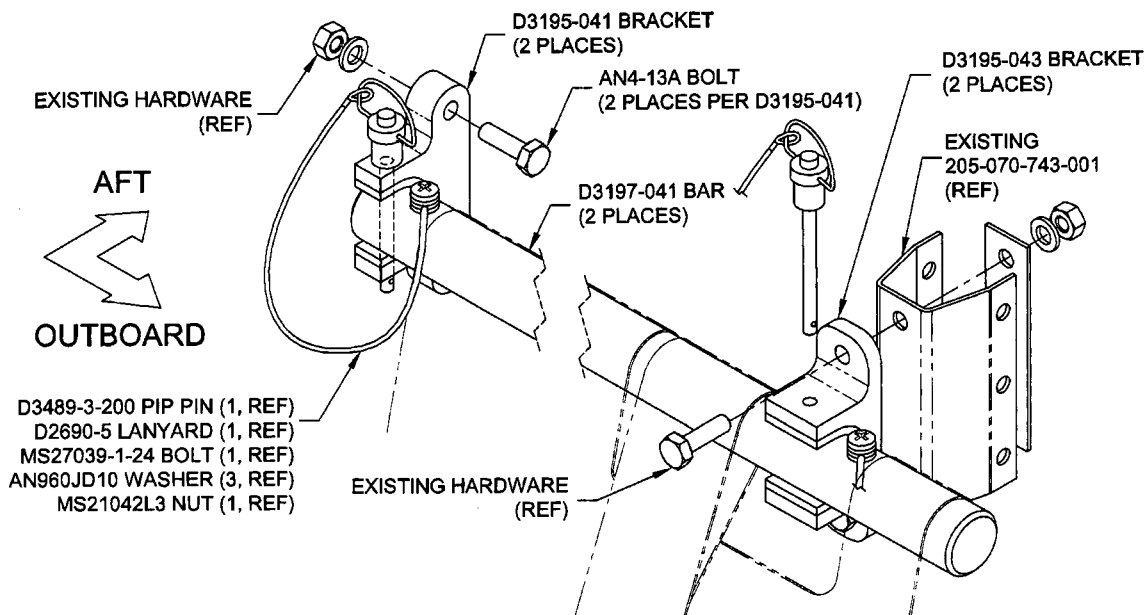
BRACKET AND BAR INSTALLATION
